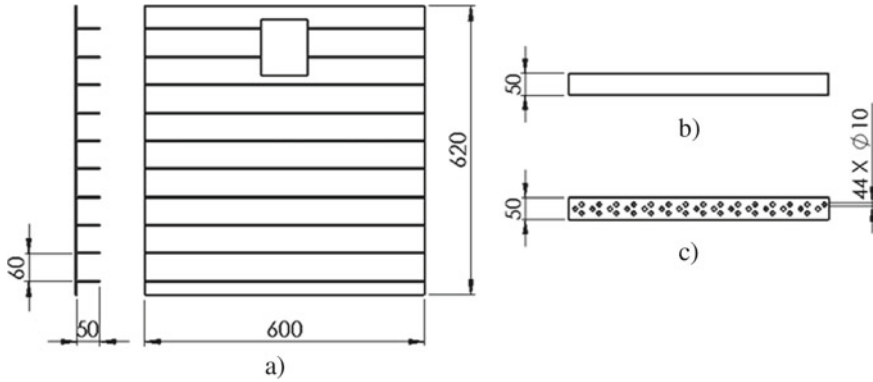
Dimensions in mm. a Heat sink, b solid fin, c perforated fin
